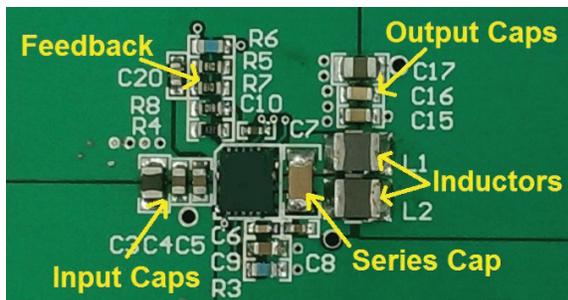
Example printed circuit board (PCB) layout for the TPS54A20.
